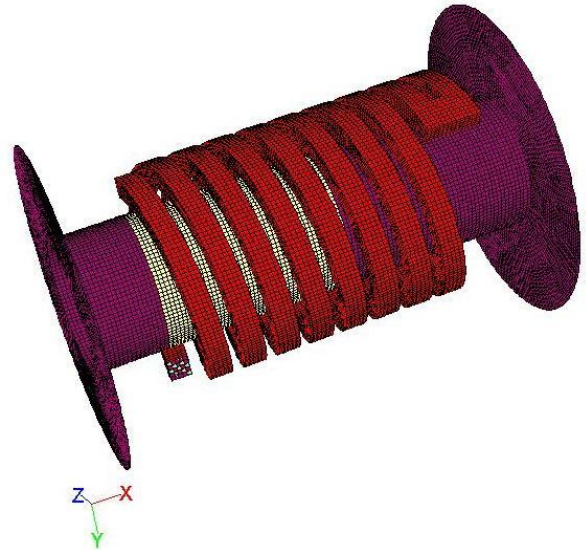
The physical model of the built-in motorized spindle with a helical channel.
